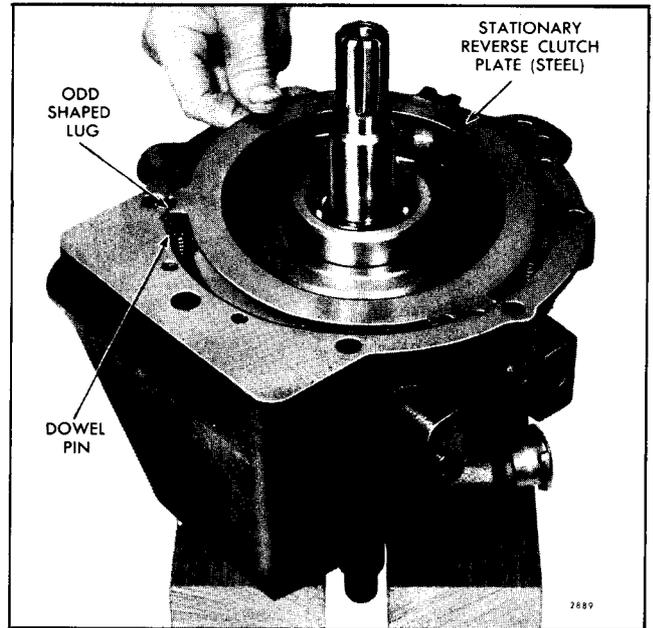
Installing Stationary Reverse Clutch Plate (Steel) in Gear Housing
